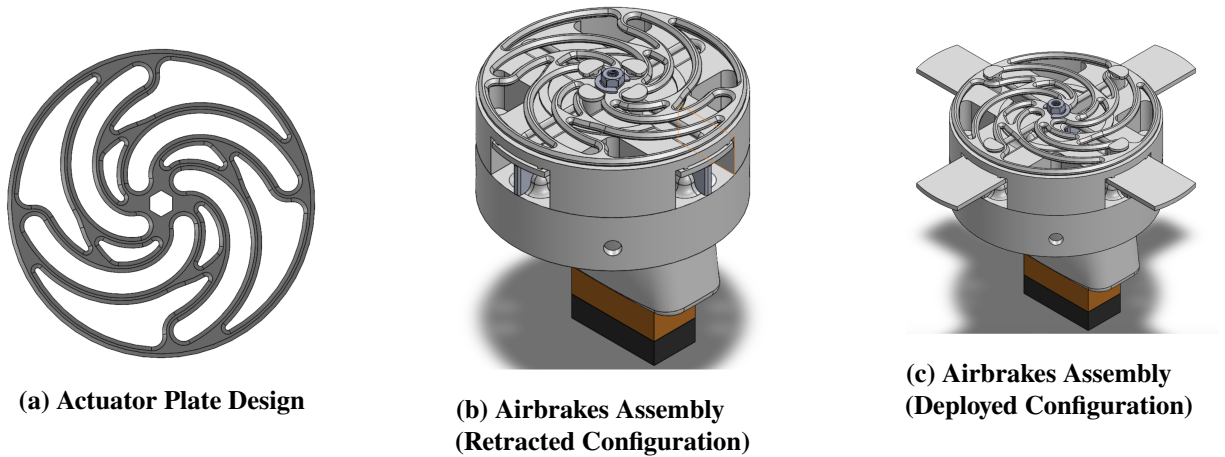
Airbrakes assembly depicting mechanical components and deployment configurations.
